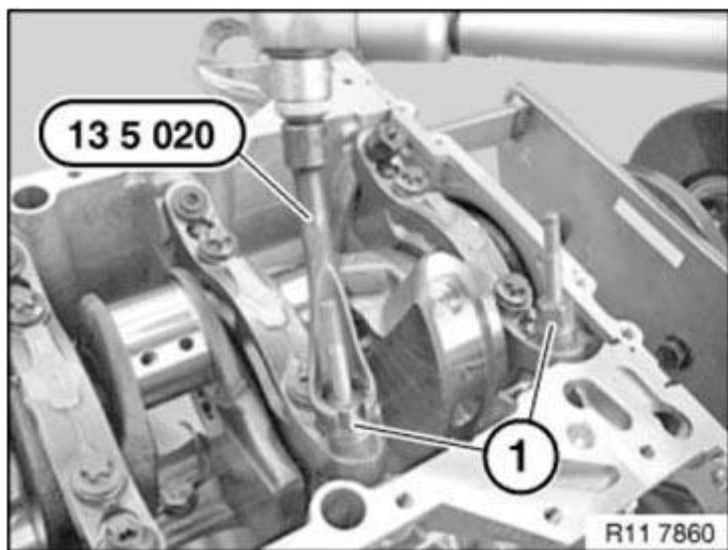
Removing Oil Pump Spacer Bolts With Special Tool 13 5 020
